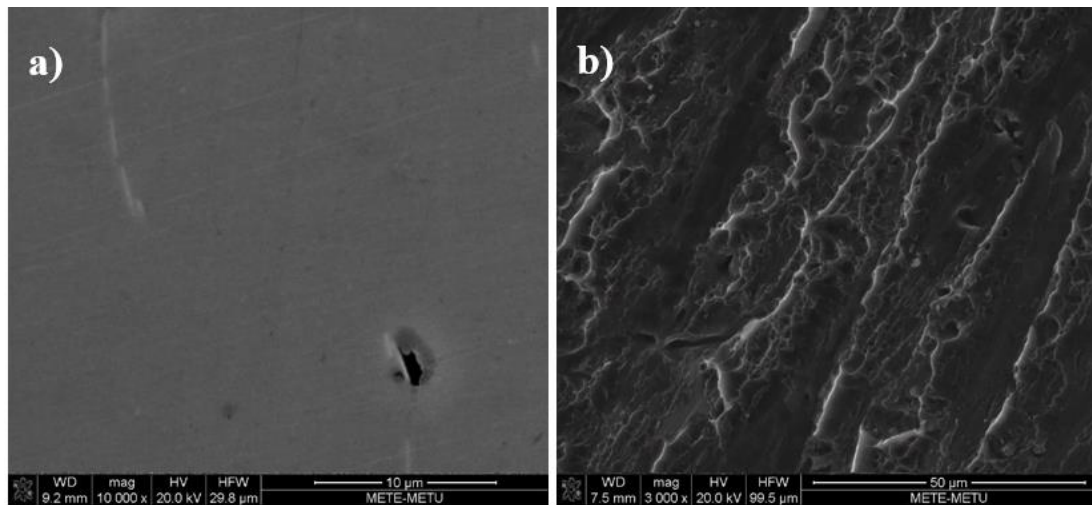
9. a) Cross-sectional view of the bond interface, b) fracture surface of the specimen, diffusion bonded under 13 MPa pressure, at 520°C, for 3 h. and cooled in air.
